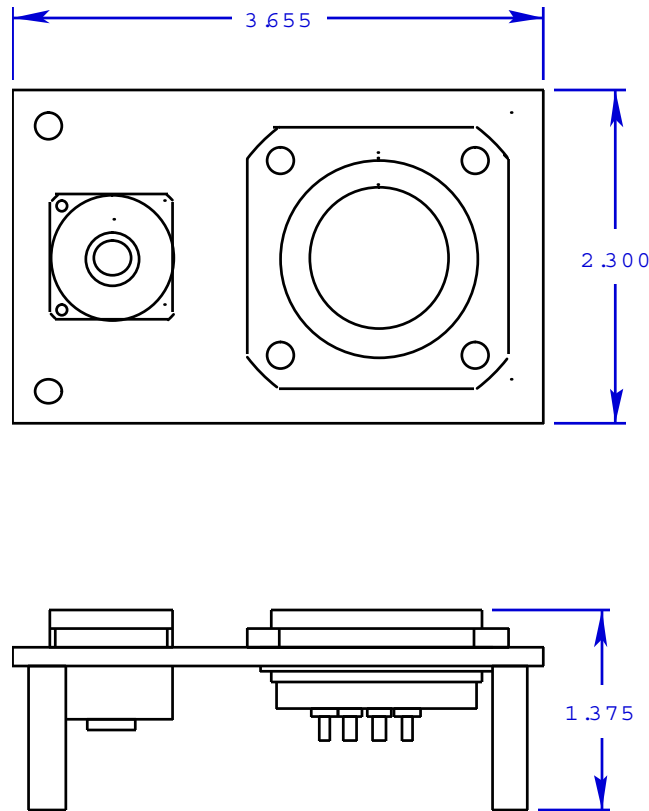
Sensor Panel Assembly (Dimensions in inches)
